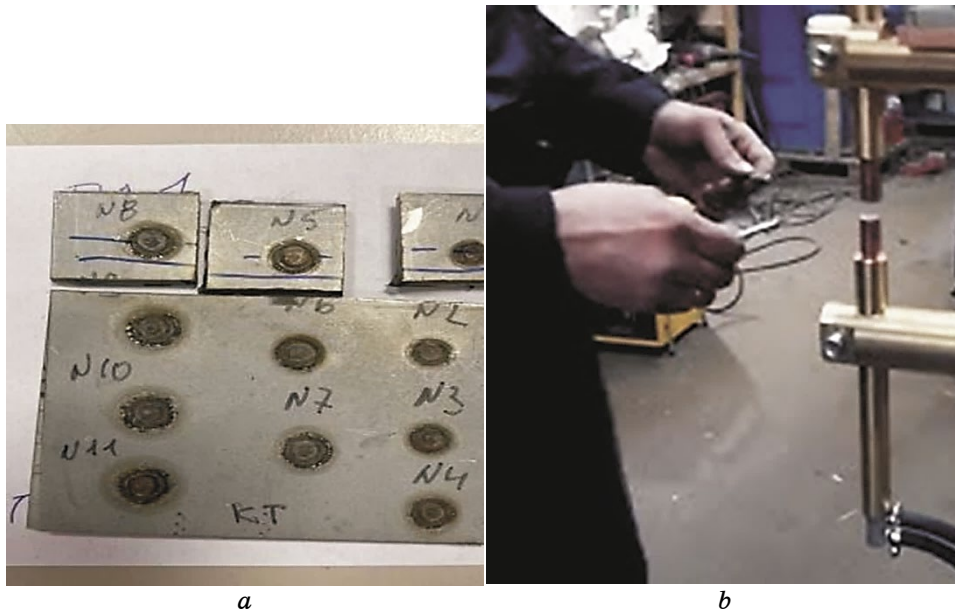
The appearance of the welded joints (a) and the process of contact spot welding (b).
